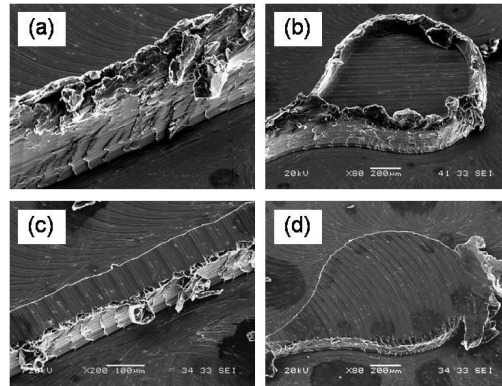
Burrs in straight wall feature mold. (a), (b) Before finish face milling pass; top burrs generated from the slot milling are comparable to the channel itself. (c), (d) After finish face milling pass; exit burrs generated from the finish face milling pass can be seen clearly.
